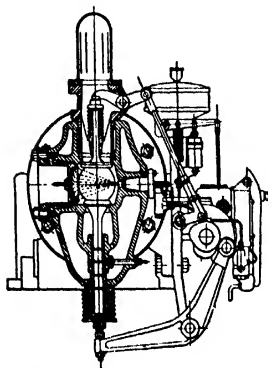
Cross Section through Combustion Chamber and Vaporizer of Crossley Engine
